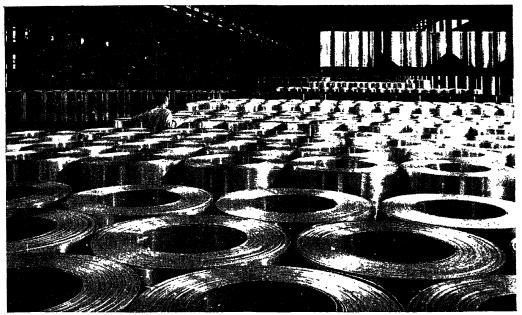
Coiled aluminum-sheet strips about to be placed in annealing furnaces. The furnaces are in the upper left-hand corner. (Courtesy of Aluminum Co. of America.)
